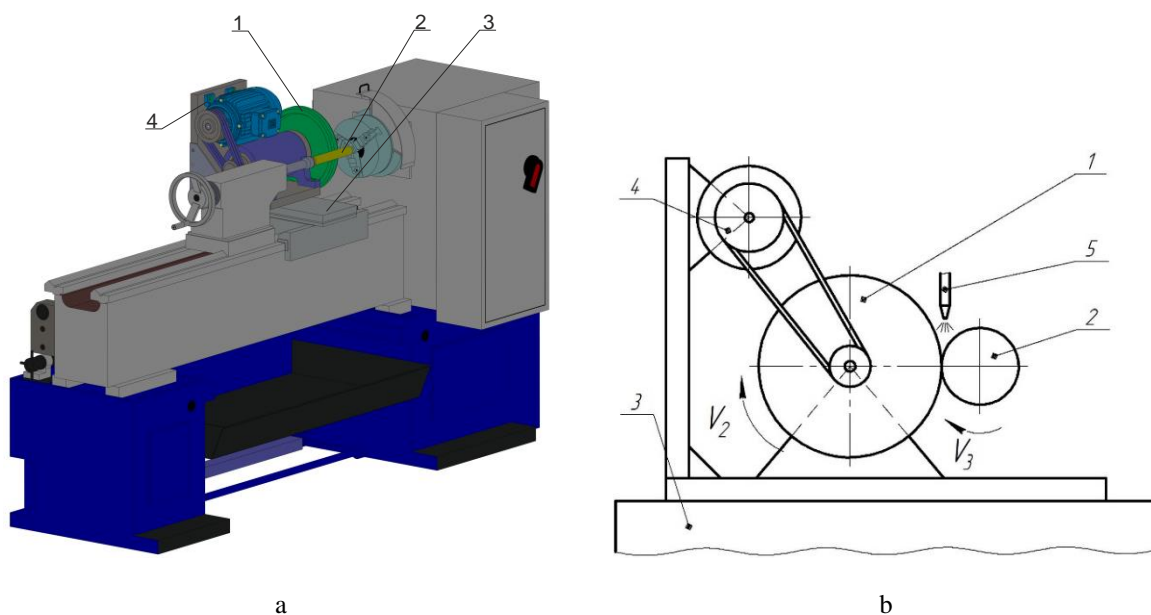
3D model (a) and simplified line diagram of the treating process (special equipment for the hardening process) (b): 1 – tool (disk with transverse grooves); 2 – part (workpiece); 3 – carriage of the lathe; 4 – an electric drive of special equipment; 5 – nozzle for feeding the technological medium
